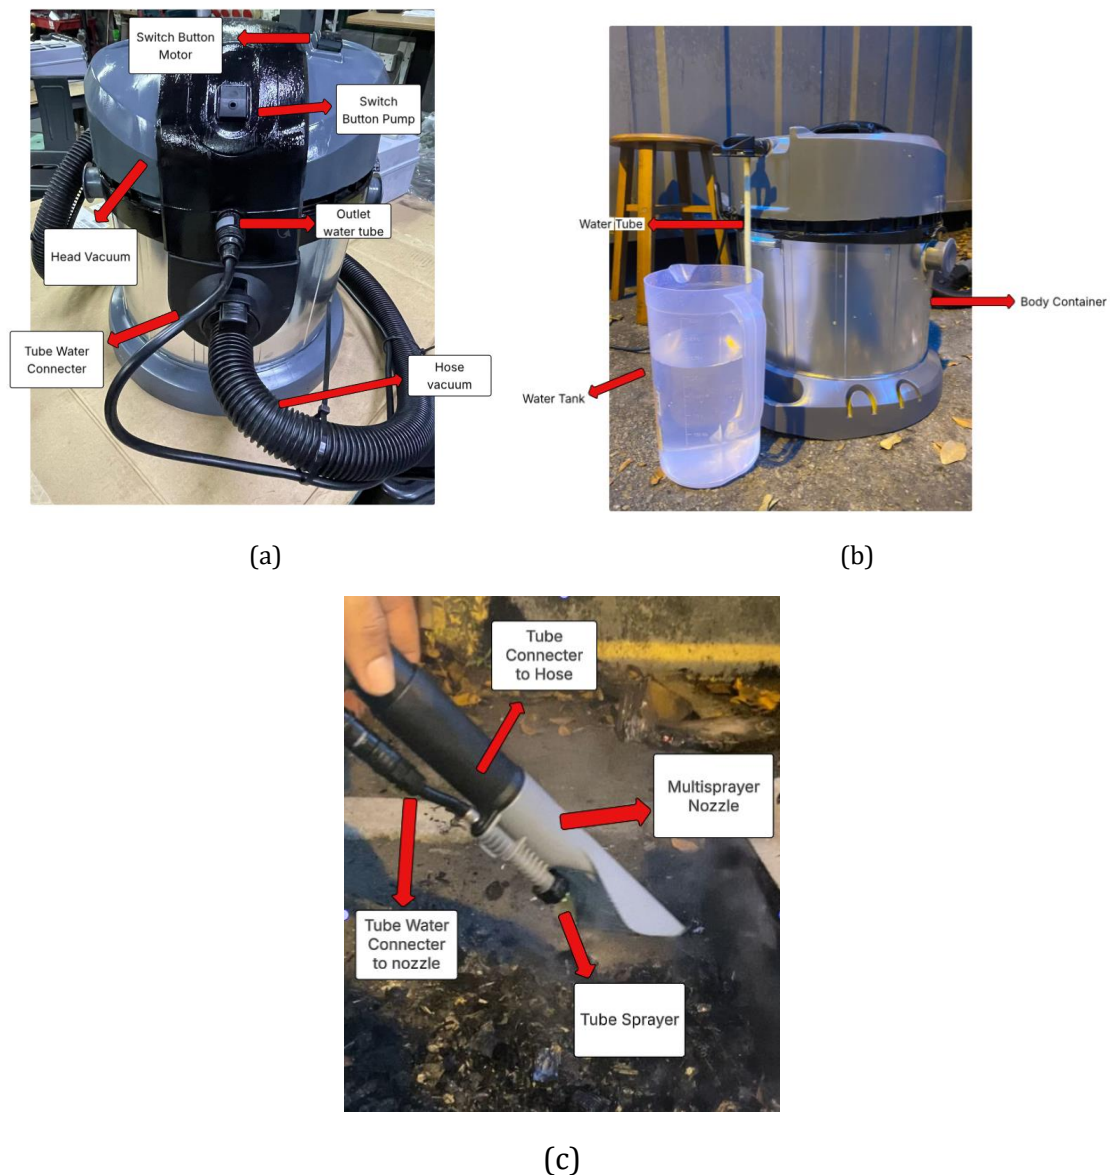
Prototype Multi-Sprayer Ash Vacuum (a) Front View Prototype (b) Back View Prototype (c) Nozzle Multisprayer
